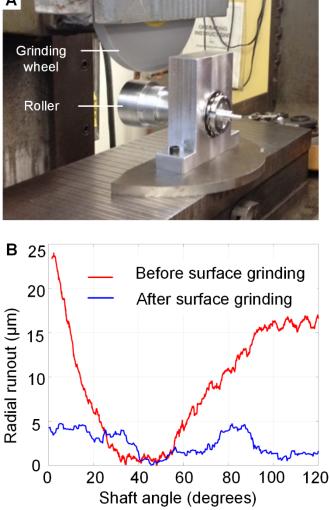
Surface grinding of the roller A) Photograph shows the surface grinding wheel and the
